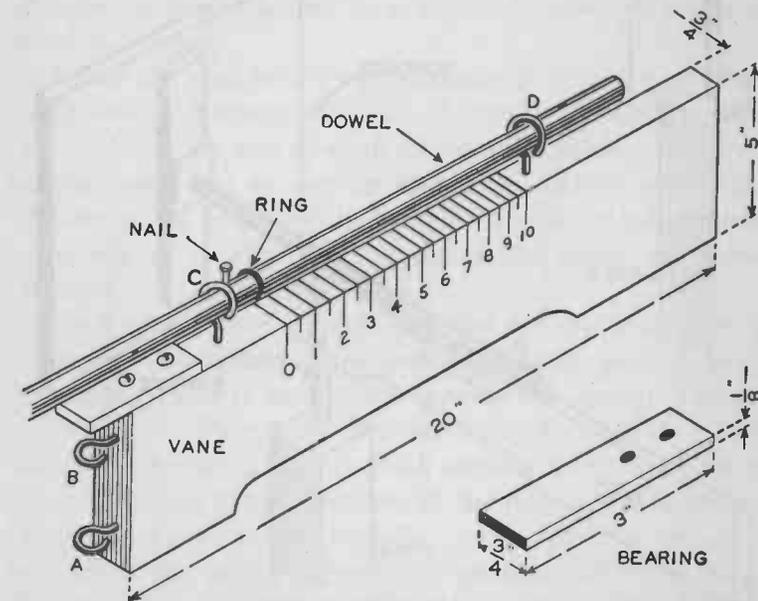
Details of the vane and the bearing for the wind pressure gauge.
